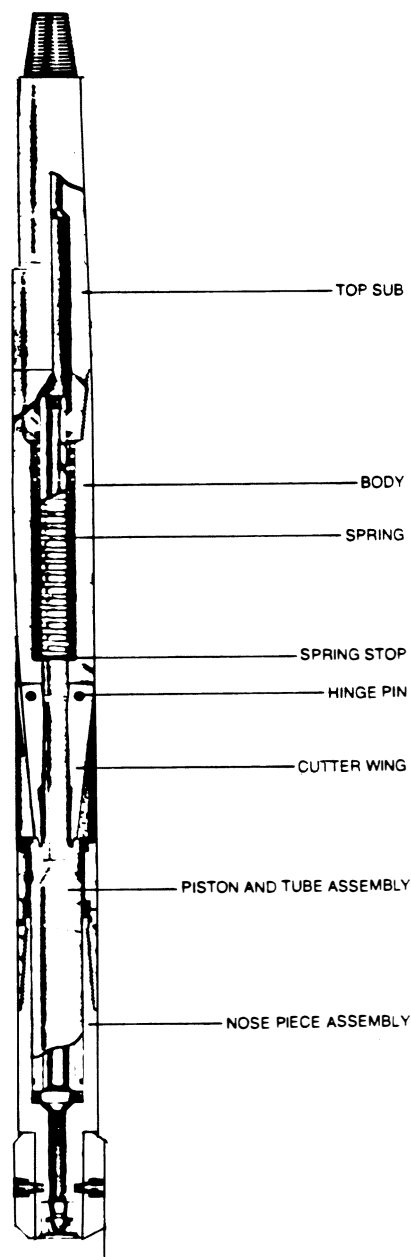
Typical section mill with arms retracted (courtesy of A-Z Intl. Tool Co.).
